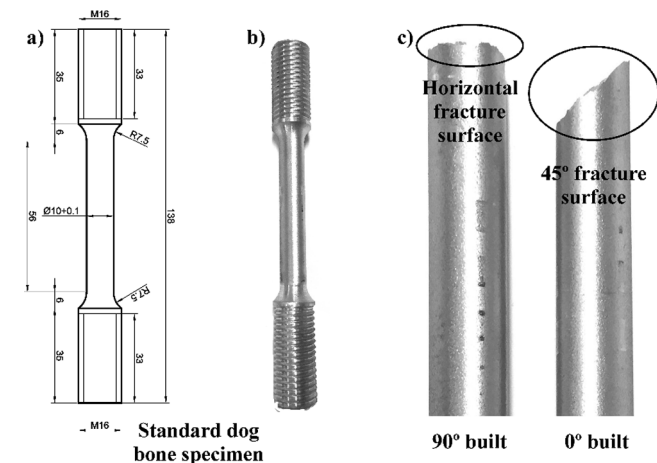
Standard dog bone specimen for tensile test: a) geometry of specimen (dimensions in mm), b) specimen photo and c) side views of fracture specimens with two build orientations.
